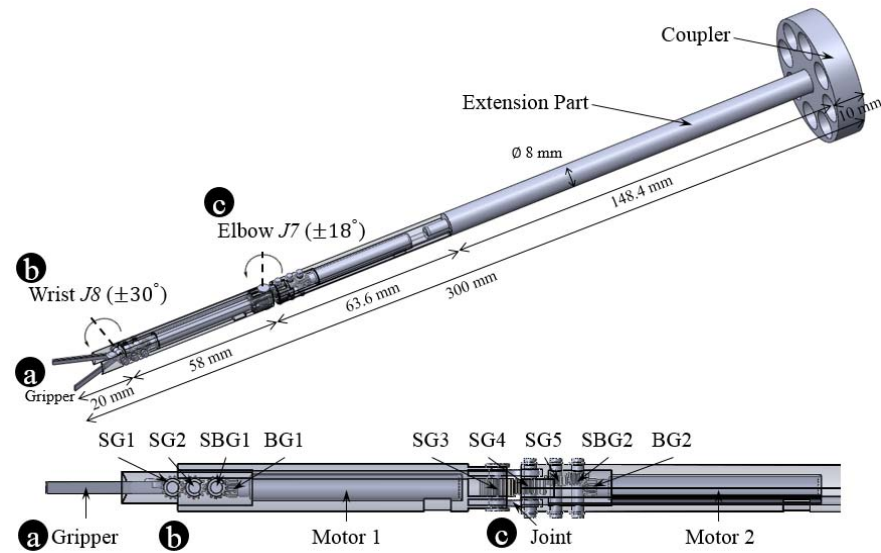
Design of surgical instrument (KS-4). (a) Pneumatic gripper. (b) Wrist joint. (c) Elbow joint. Several gears, outer shells, micro motors, and joint link are assembled. This instrument performs elbow, wrist, and gripping motions. The surgical instrument's length and outer diameter are 300 mm and 8 mm, respectively.
